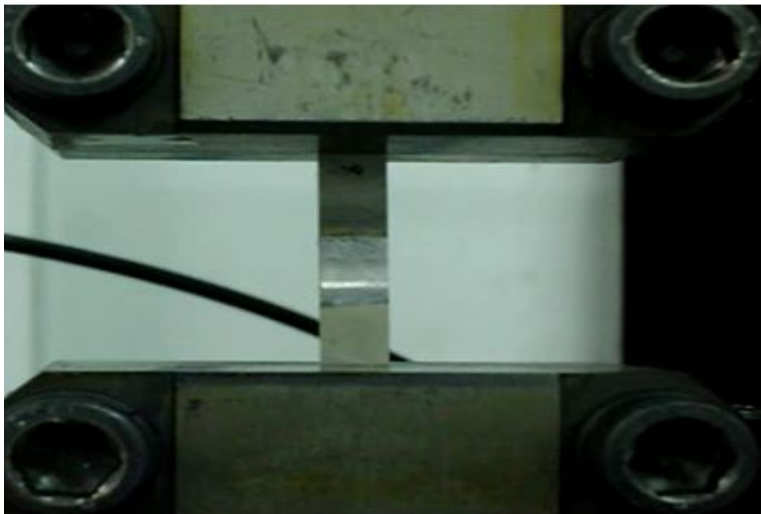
Tensile test of Friction stir welded SS400
